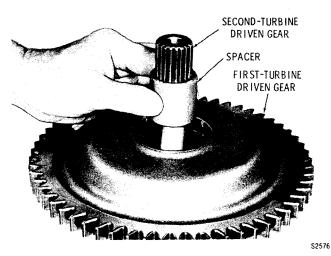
Installing bearing spacer onto second-turbine driven gear
